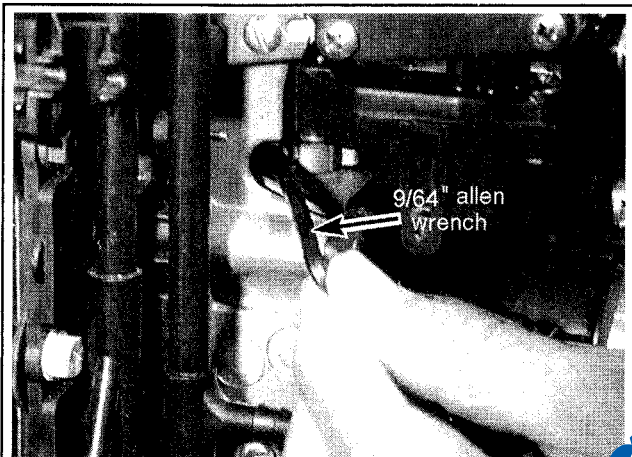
Use a 9/64 in. hex key or driver to loosen/tighten the throttle shaft connector screws
